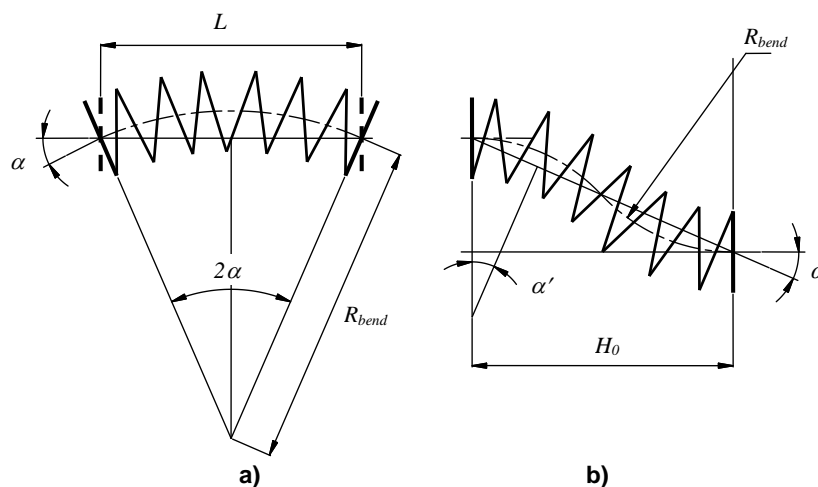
Calculation scheme for finding the radius of bending for the elevator flexible screw member:
